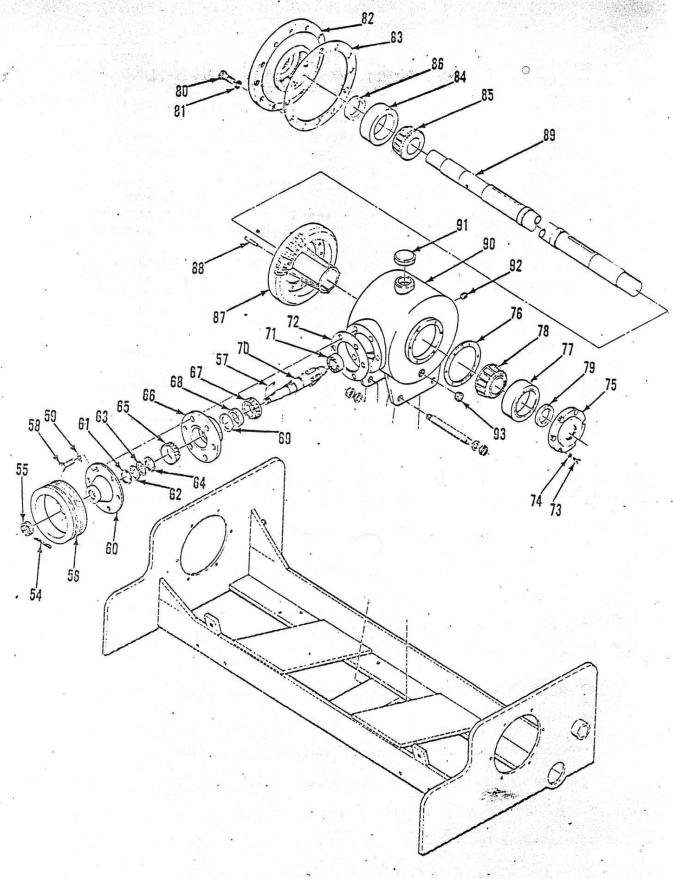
Drawworks and Drive Assembly (View 2 of 2)
